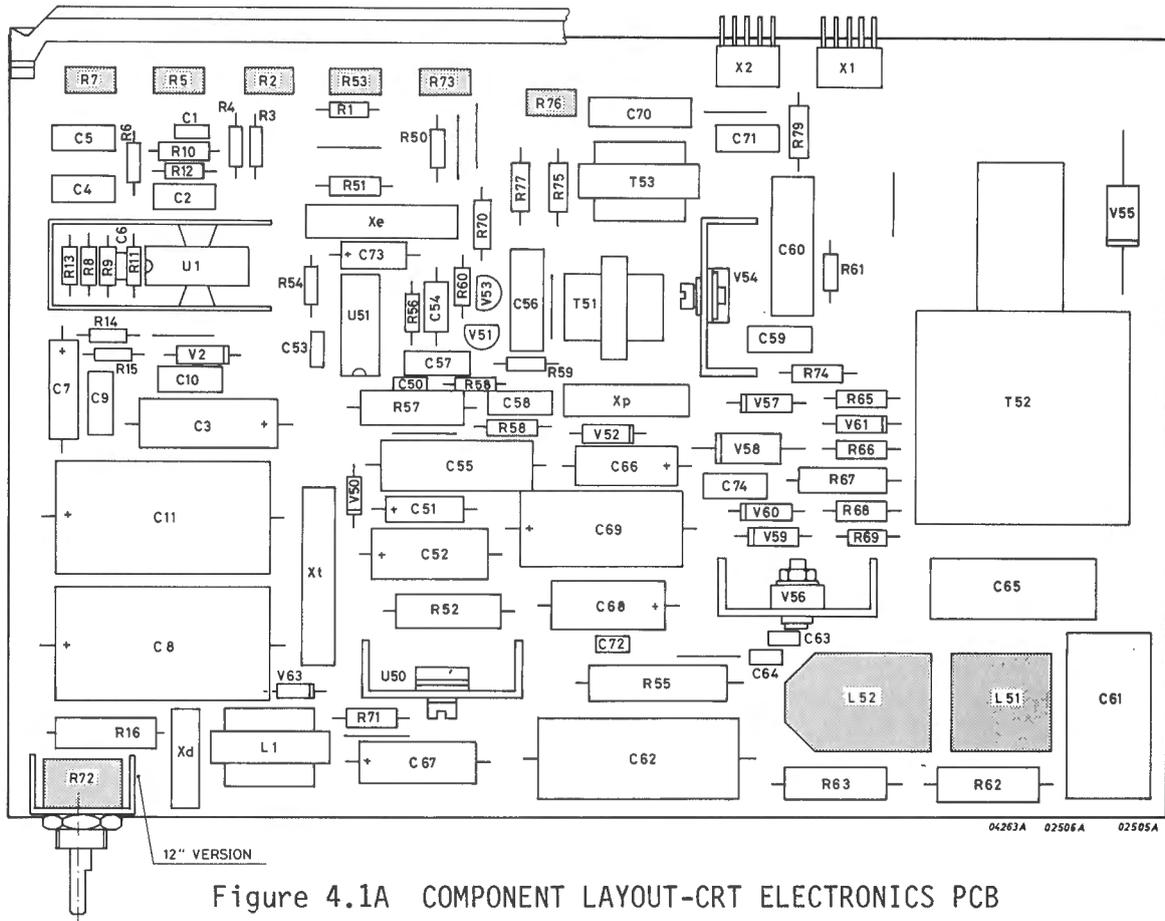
A COMPONENT LAYOUT-CRT ELECTRONICS PCB
